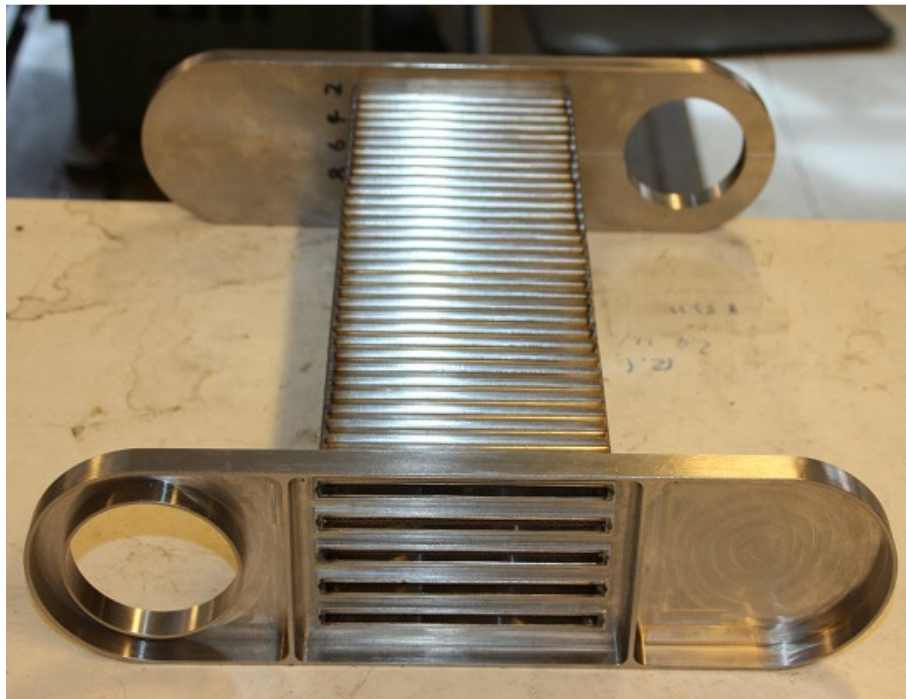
End view of the reformer plate assembly, showing the feed gas entry to the five catalyst plates
